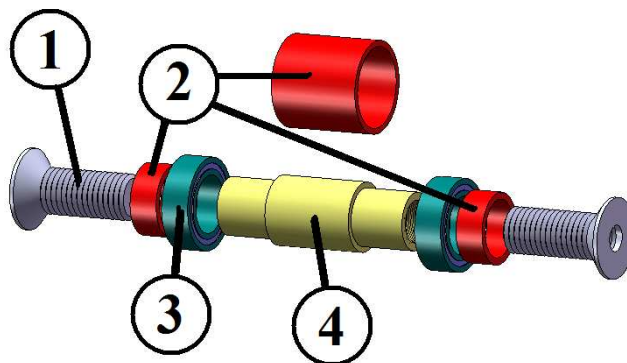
CAD representation of joint components M4 screw, bearings and bearing plates
